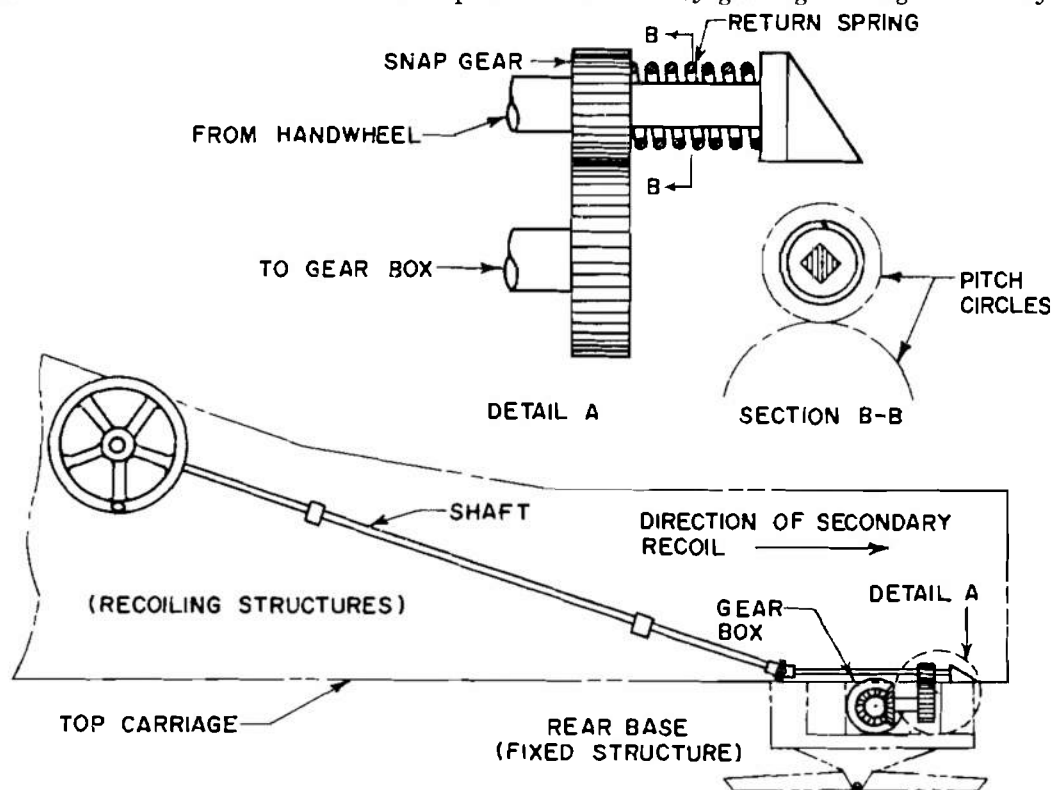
Arrangement of Traversing Mechanism—Double Recoil Carriage
